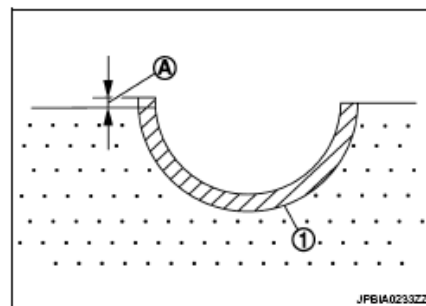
Identifying Connecting Rod Bearing Crush Height
